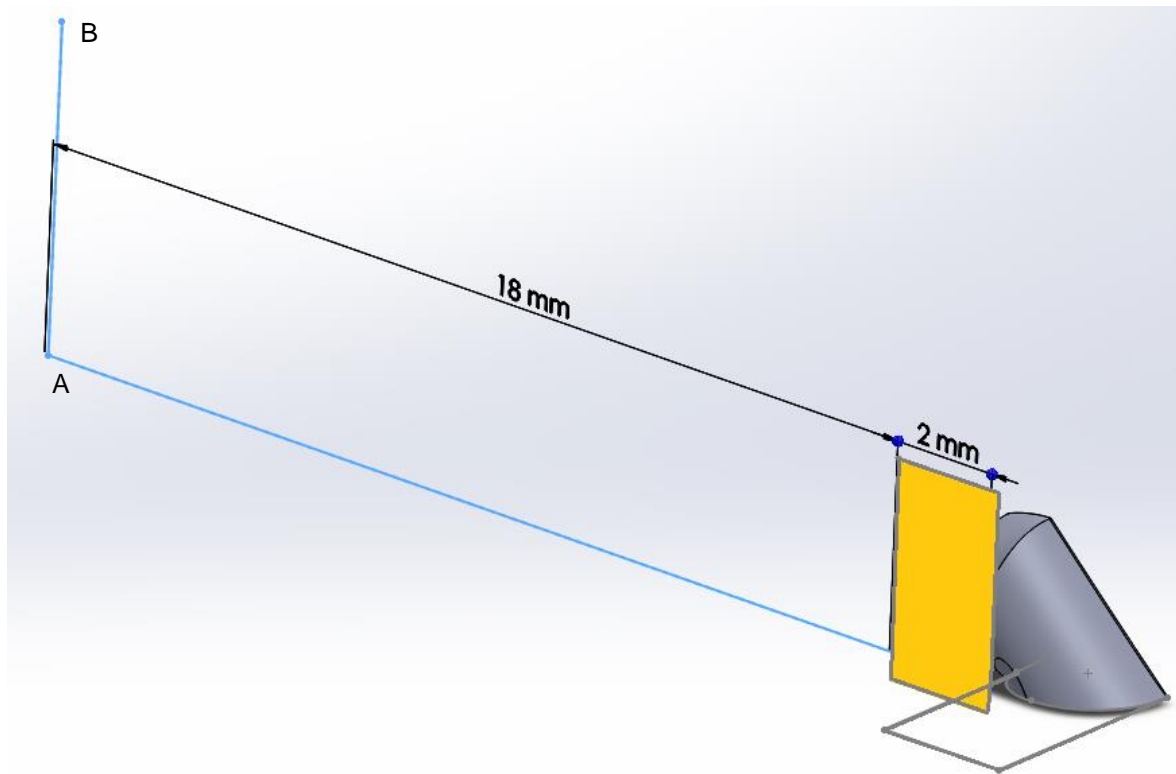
Weld end geometry before the revolution cut considering the AB axis.
